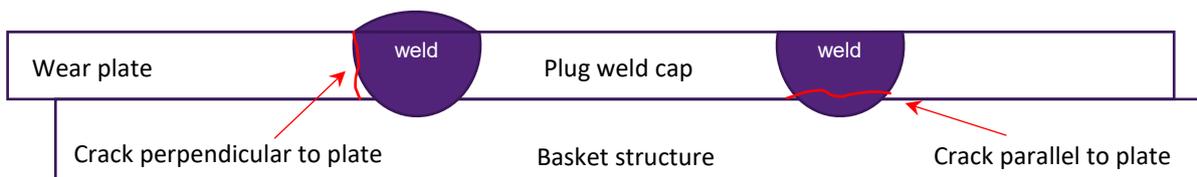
Depiction of plug weld crack plane and visibility. The perpendicular cracking and unworn welds are visible (left weld), whereas the parallel cracking and worn welds are invisible (right weld).
